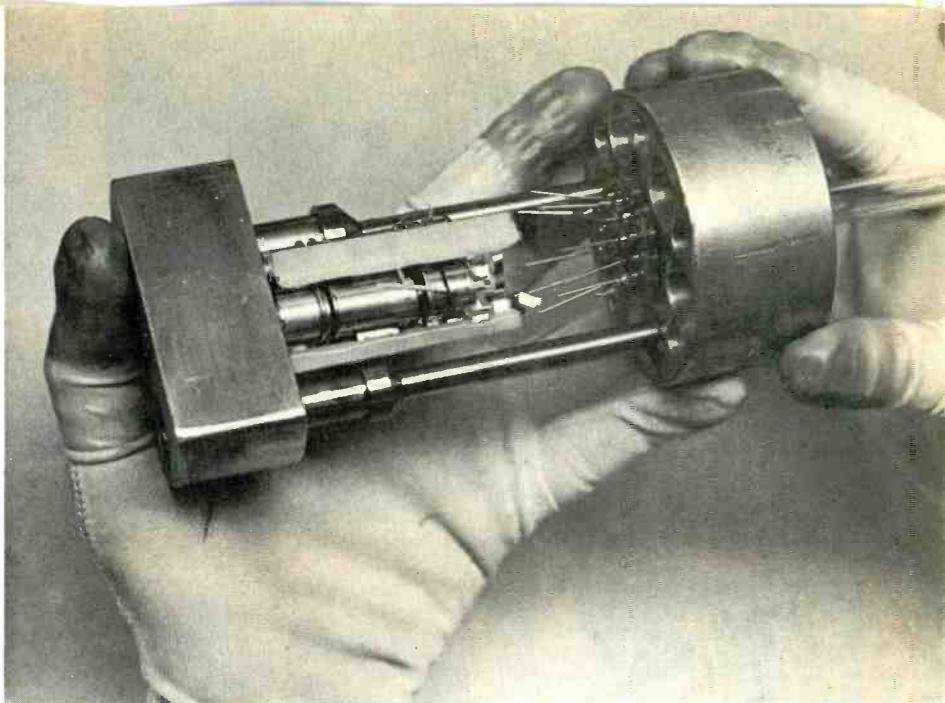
The three color guns are mounted on the picture tube stem in this step of the remanufacturing process.
